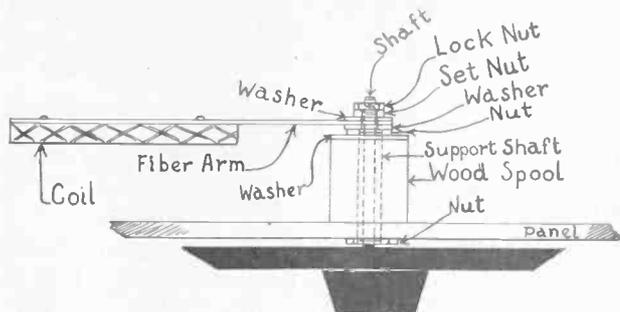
, how to make the variable tuning inductance. The shaft may be a standard 3/4" bolt, the head sawed off. The stabilizing shaft is a cotton spool with one flange removed. The remaining flange is placed against the panel. This instrument is made of parts readily obtainable, although the commercial model is mechanically different.
